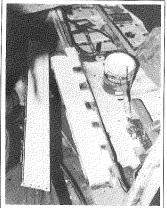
Give both inner surfaces a good coat of paint leaving the areas to be welded as clear shiny metal.
